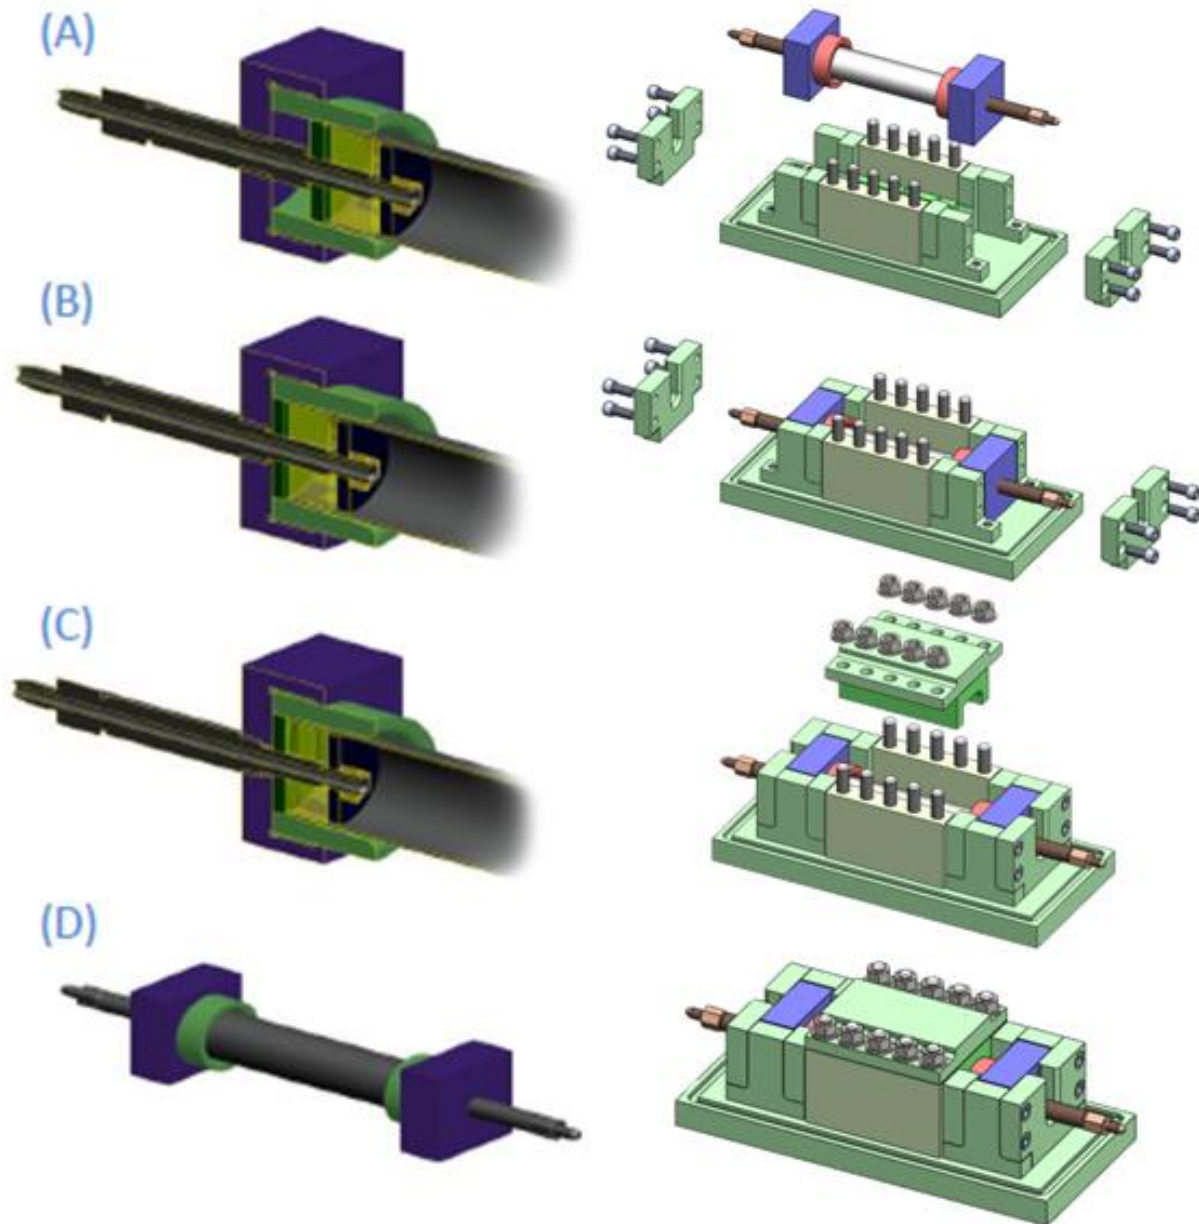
Assembly of seals and end-blocks for replacing workpiece.
